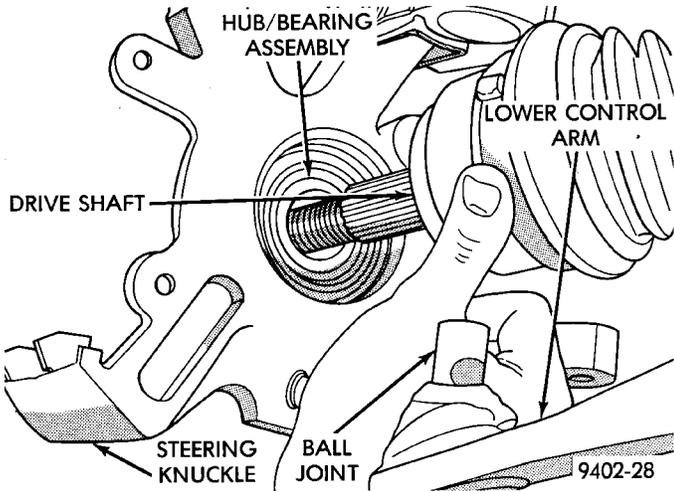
Driveshaft Installation Into Hub And Steering Knuckle
